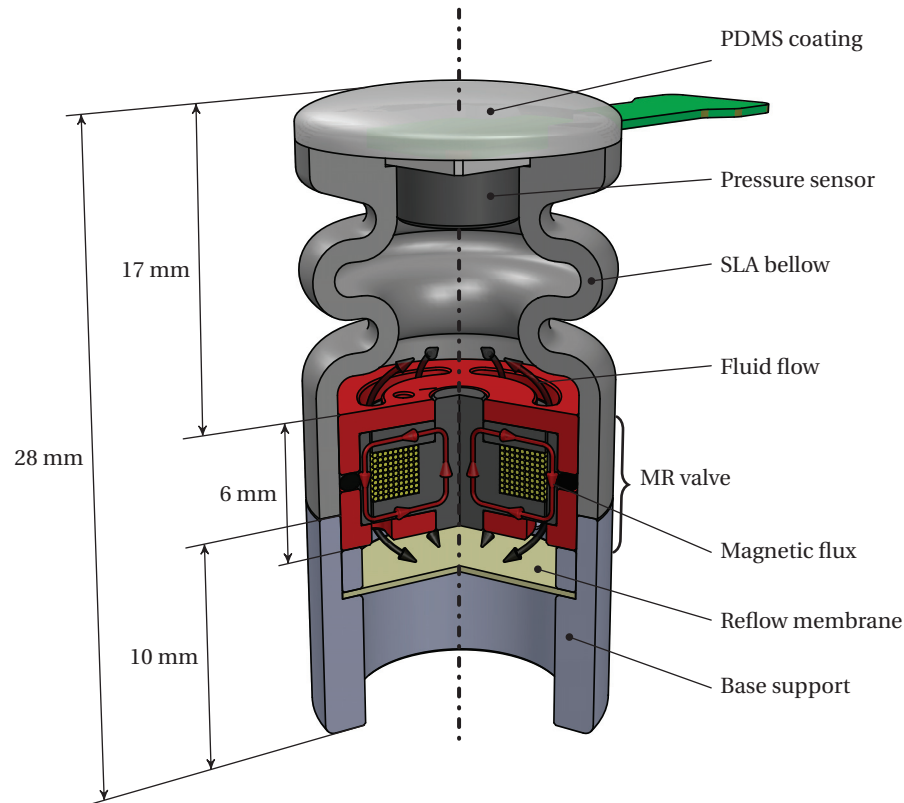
Detailed cross-section of the complete miniature soft MR plantar pressure limiter.
